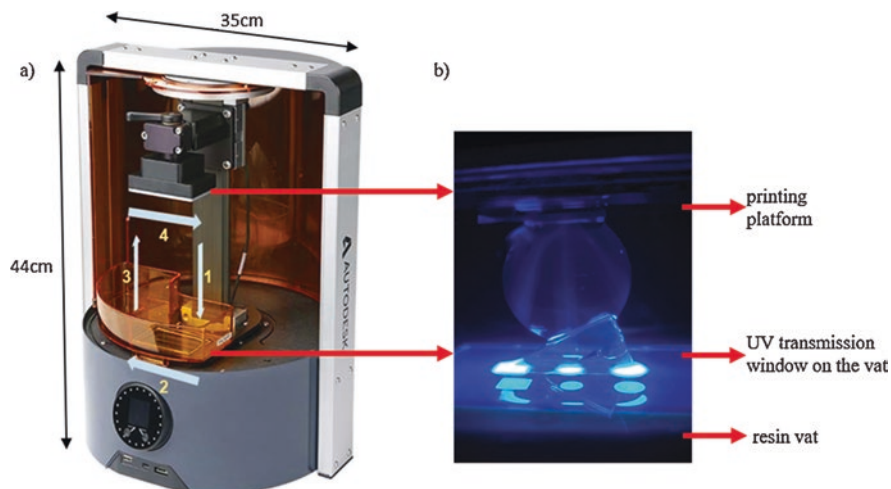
(a) 3D printing machine used for multiple material printing; (b) normal operation of the printer, yielding single-material prints—a print job is shown during the exposure step of the print cycle. Each printing cycle accumulates a layer on the printing platform, thereby additively manufacturing the sample
